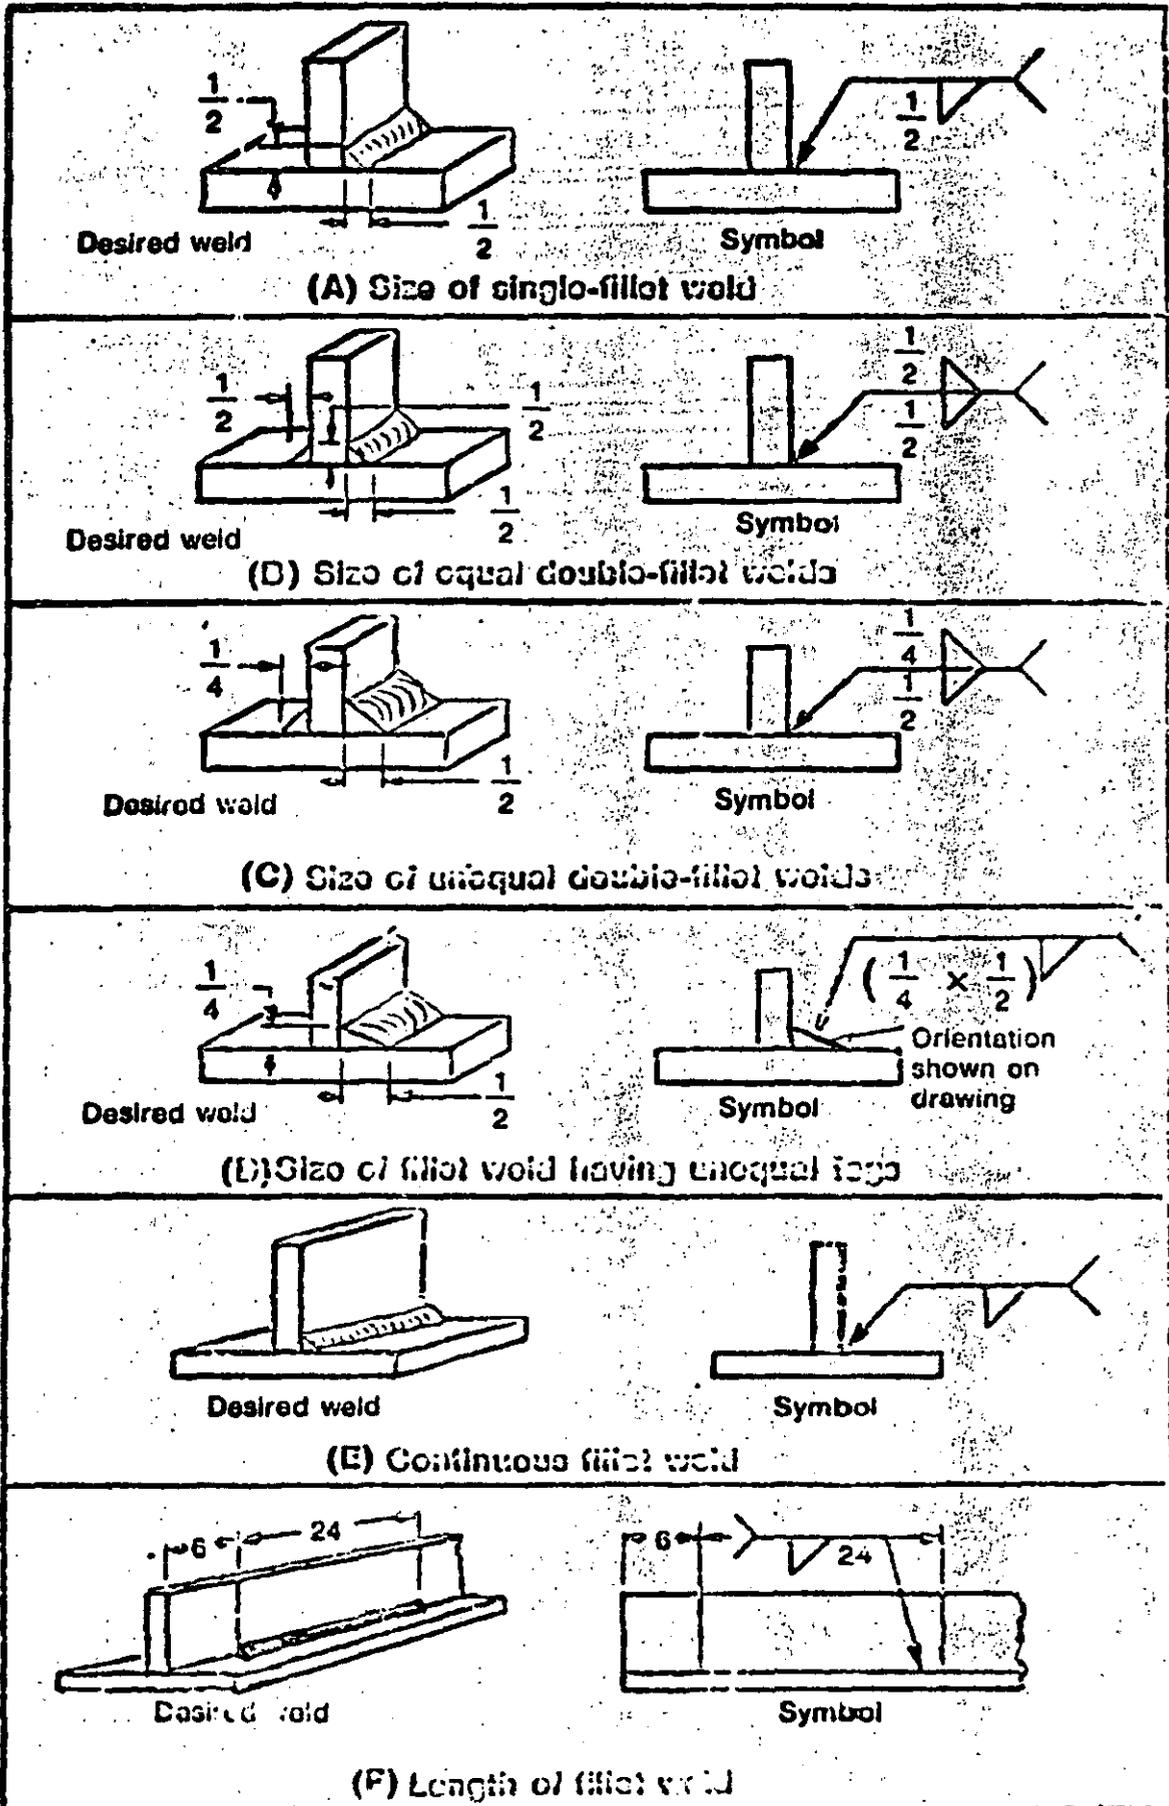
Application of dimensions to fillet weld symbols.
